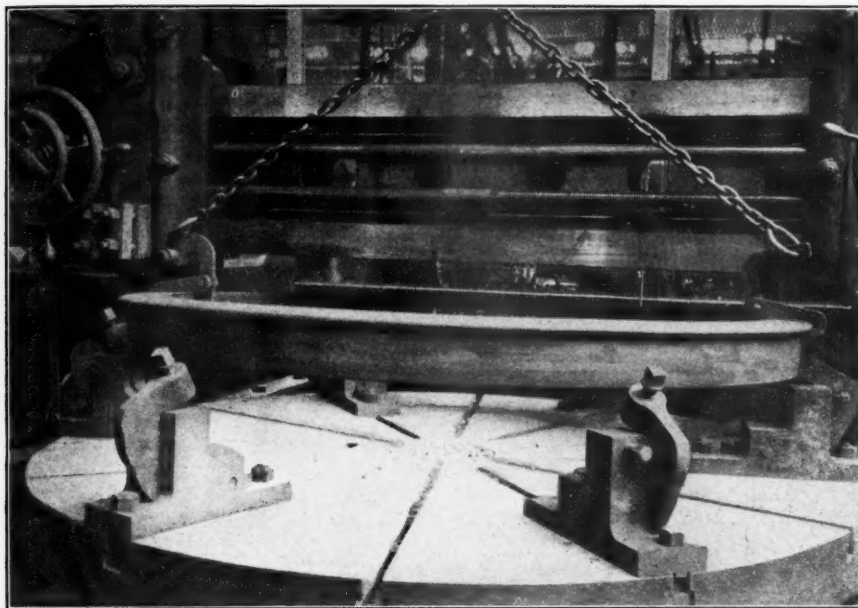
Driving Wheel Tire About to be Placed in the Chucks.
